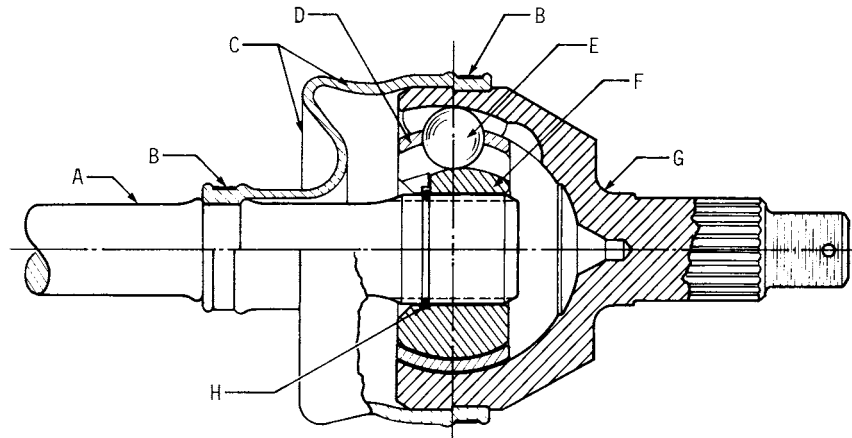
Rzeppa universal joint in cross section. A, shaft; B, clamp or band; C, boot seal; D, cage; E, ball; F, inner race; G, bell-type outer race; H, retaining ring. (From Ref. [16.6].)
